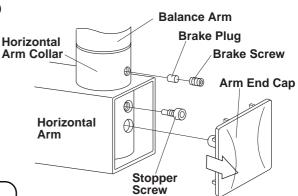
Attaching Balance Arm to Horizontal Arm
